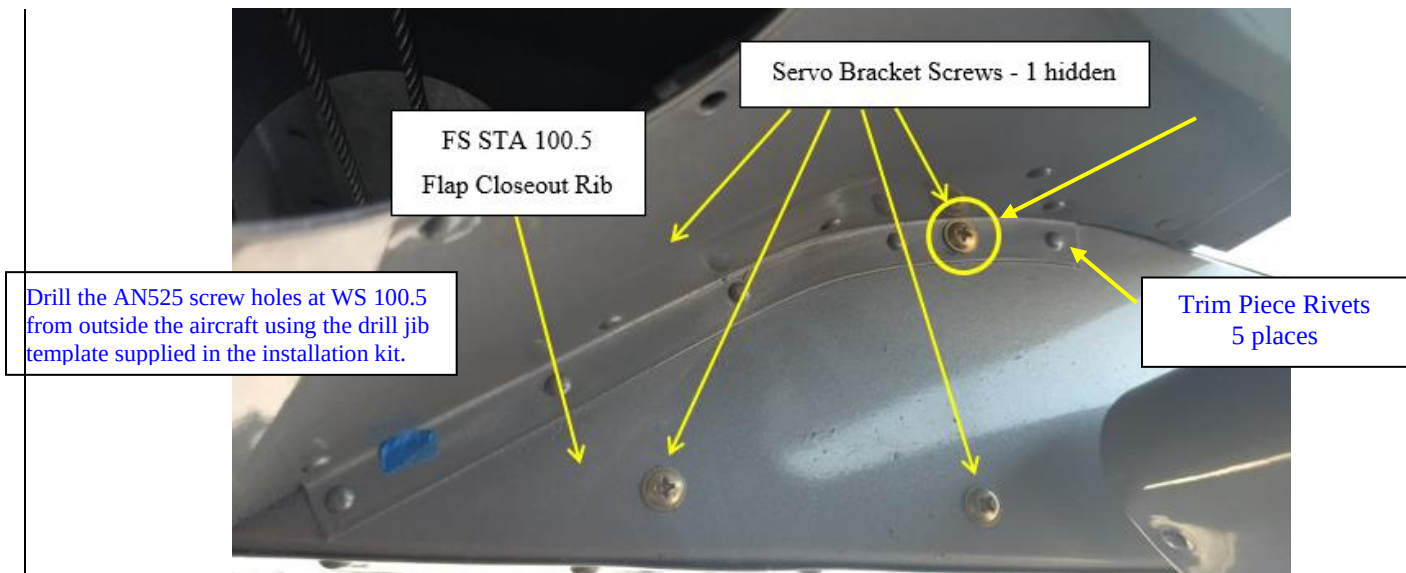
ROLL SERVO & MOUNTING PLATE INSTALLATION
